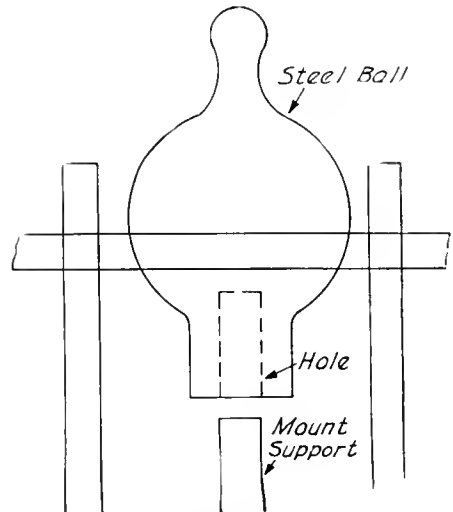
Means Employed for Mounting Filaments in Center of Bulb
